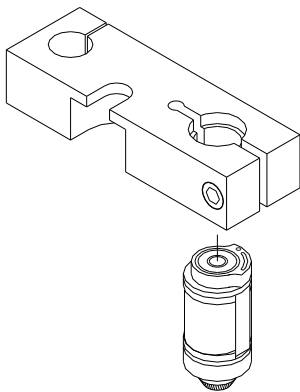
ECCENTRIC SHAFT ASSAMBLY
